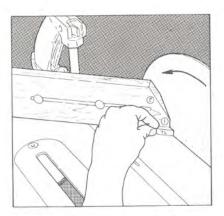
Resurface the beveled ends of the long guide blocks with the miter gauge set at 45° right and the table set at "0".
